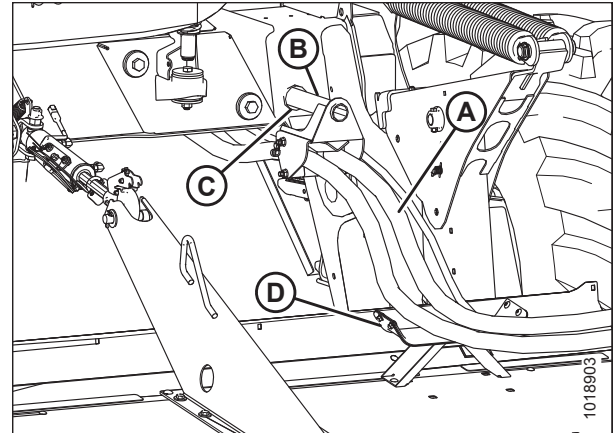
R1 Rotary Disc Header Hose Support Attachment
